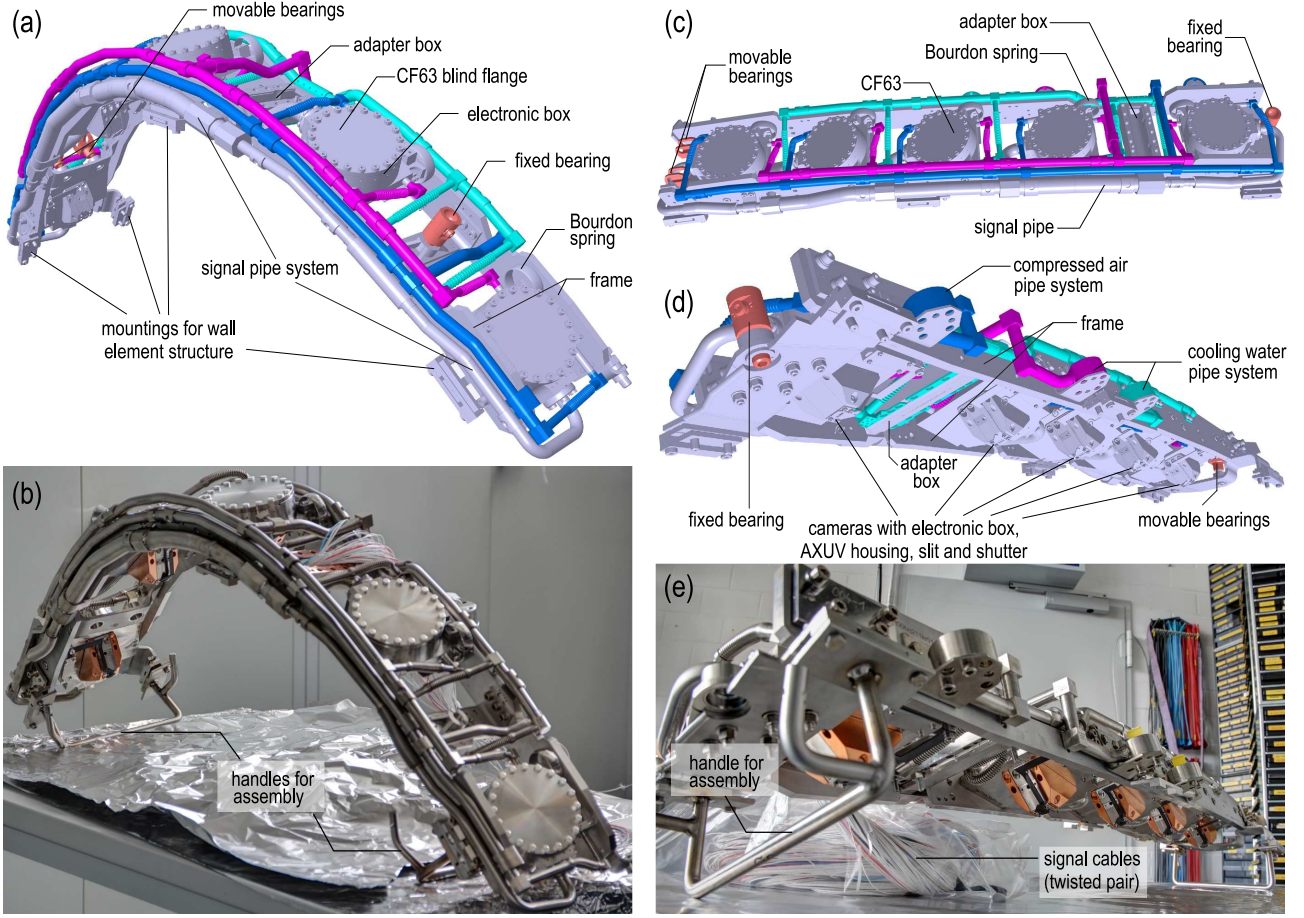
(Color online) The two types of segments: the bent segment (a) as planned in CAD and (b) after preassembly; the straight segment (c,d) as planned in CAD and (e) after preassembly. (At the time of the photographs taken the bearings have not been delivered yet, and are thus missing.)
